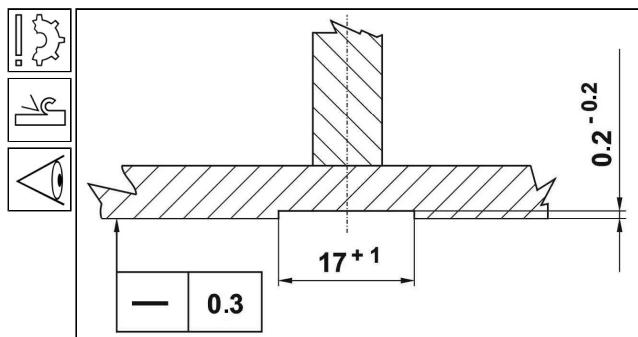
Checking the bearing surface for the brake lining on the brake shoe
